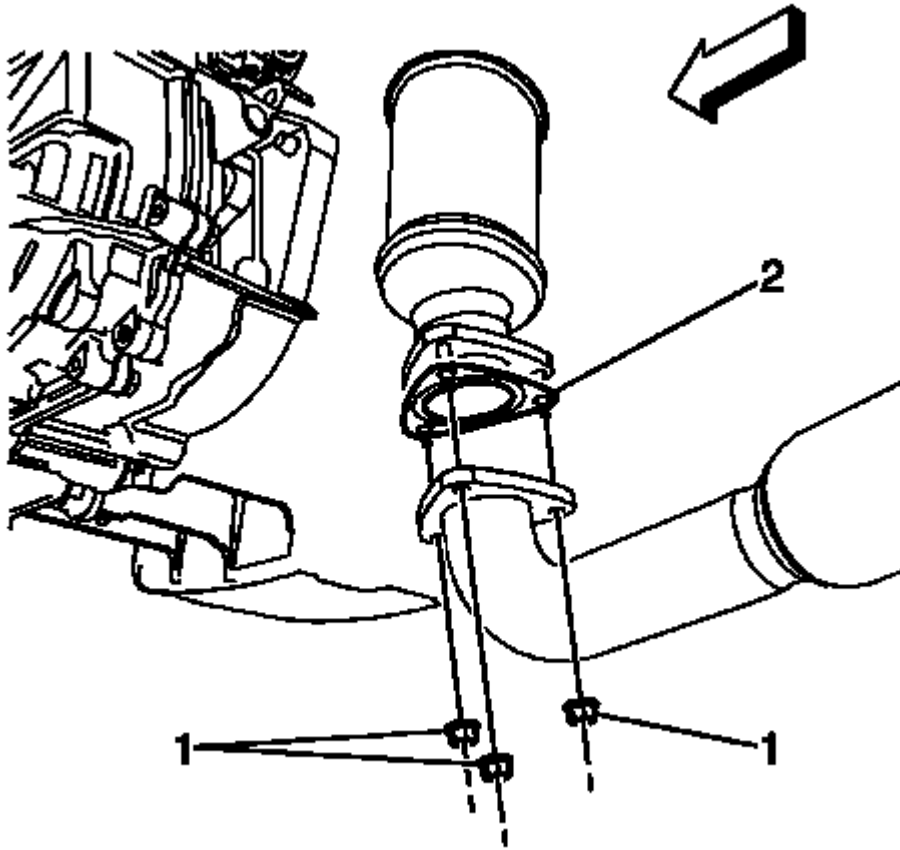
Lower Catalytic Converter, Nuts And Gasket
